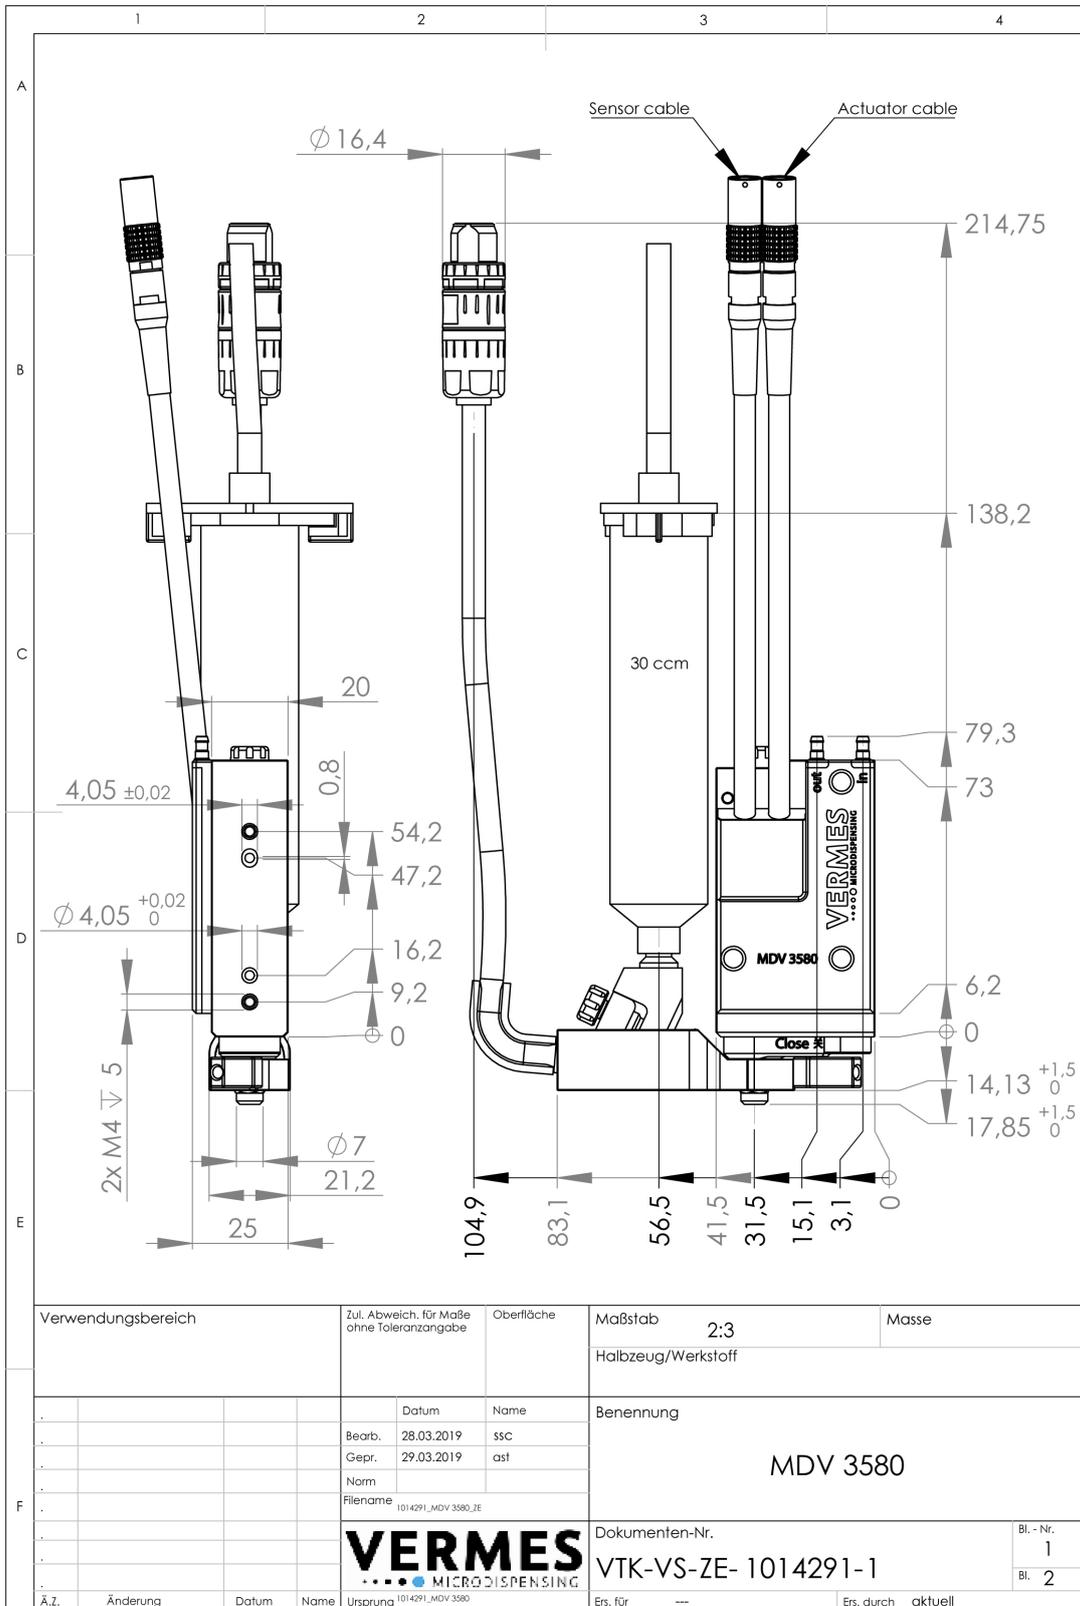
Dimensional Drawing MDV 3580 front and sides
